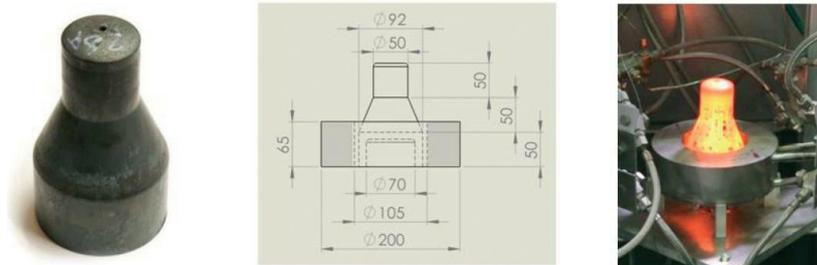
Demonstration component "stepped shaft" and experimental setup in the spray-field
